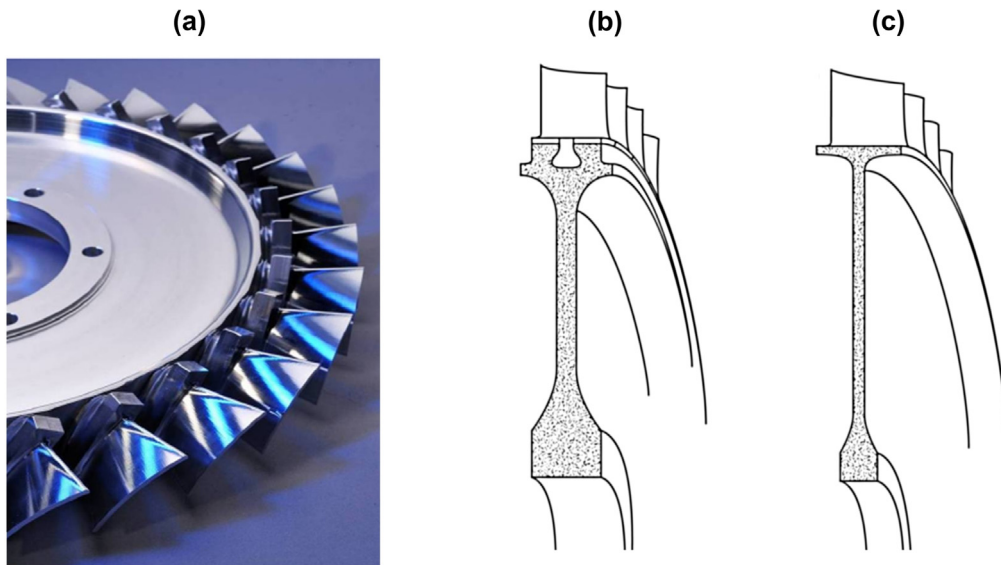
(a) an integrated bladed disk (blisk) manufactured at TWI (image courtesy of TWI), (b) a conventional bladed disk assembly [7] and (c) a linear friction welded blisk [7].
